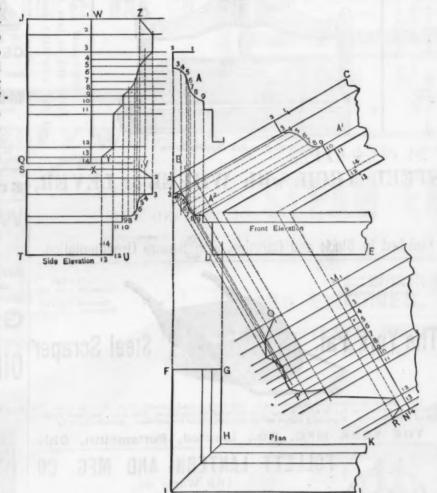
To Ascertain the Profile of a Horizontal Molding Adapted to Miter with a Given Inclined Molding at Right Angles in Plun, and the Several Miter Patterns Involved.
